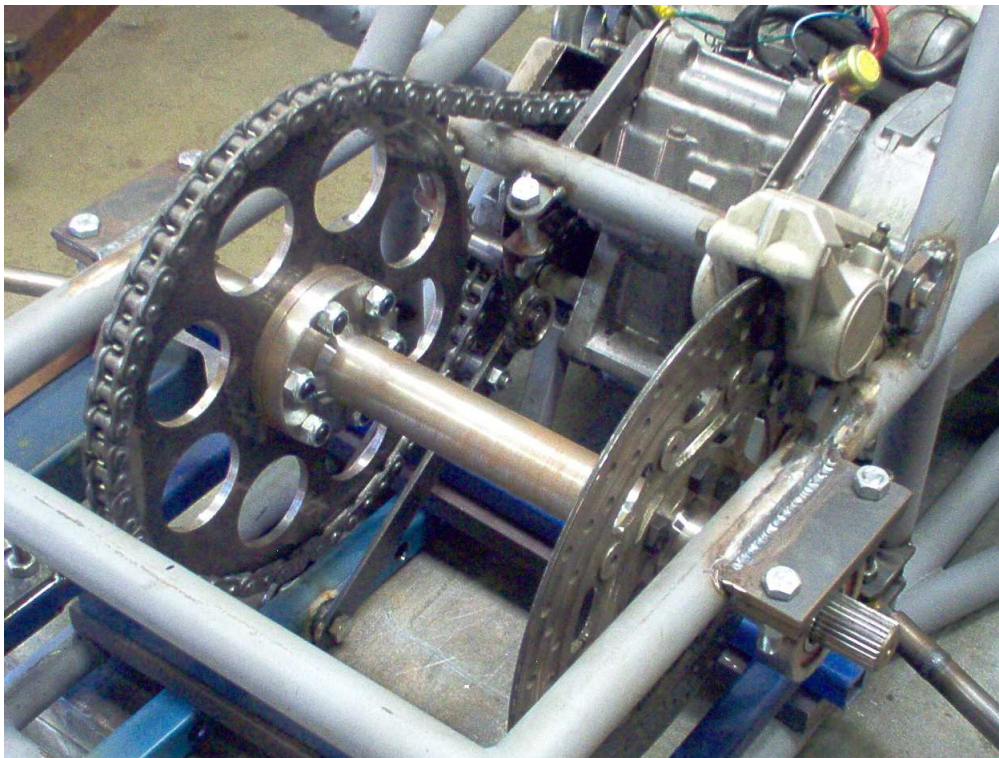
Picture of the centre shaft and accociated components assembled in the car.
